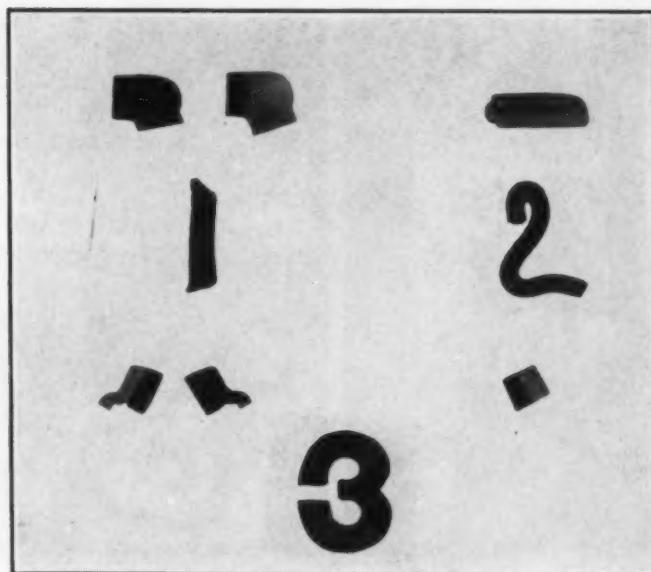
Radiogram of Small Welded Pieces. $\times 1$.
